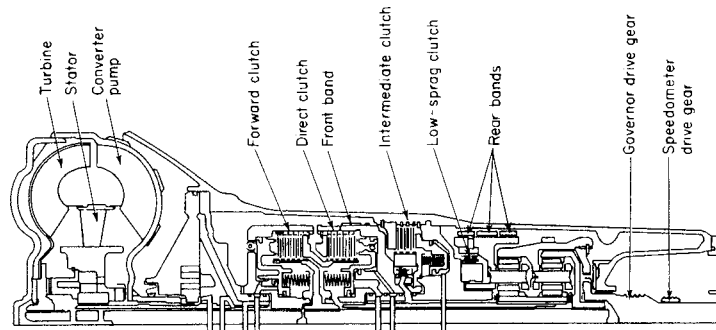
Three-element torque converter and planetary gear. (General Motors Corp.)
